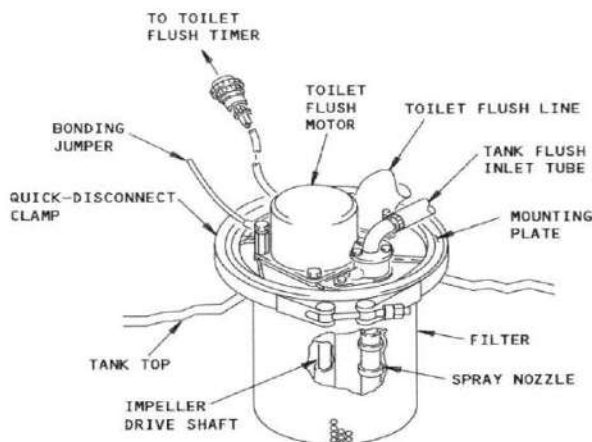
Toilet flush pump, motor and filter Toilet Tank Drain Valve
